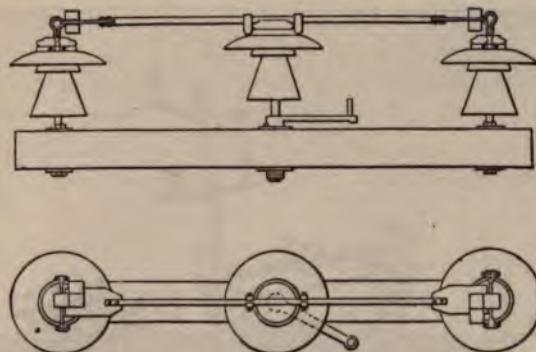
60,000-VOLT OUTDOOR LINE SWITCH
